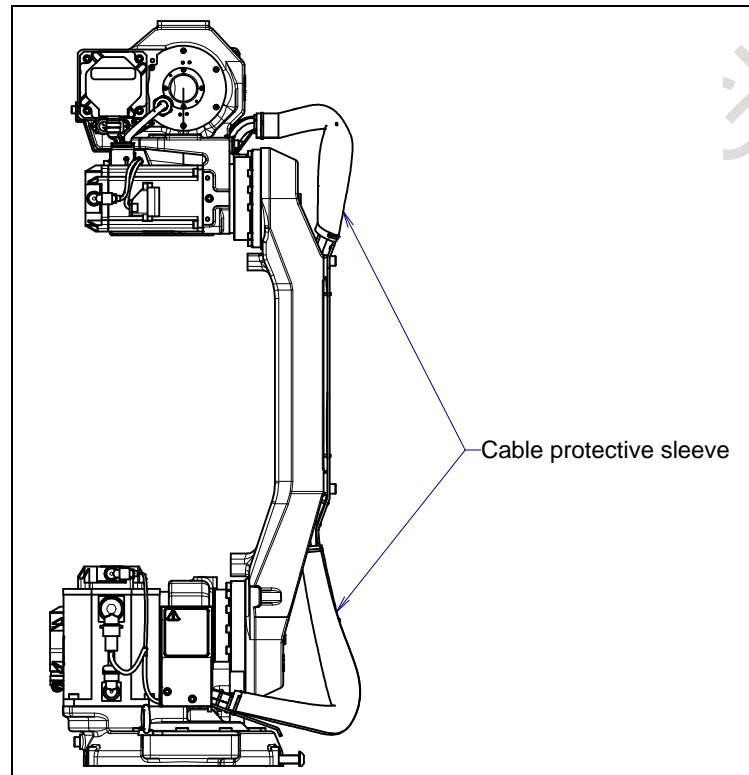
(a) Replacing cable kit (J2/J3-axis cable protective sleeve)
